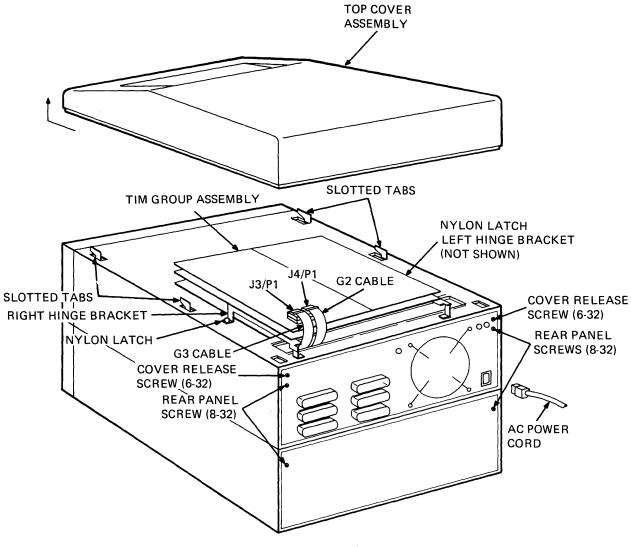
Top Cover and TIM Group Assembly, Removal and Replacement
